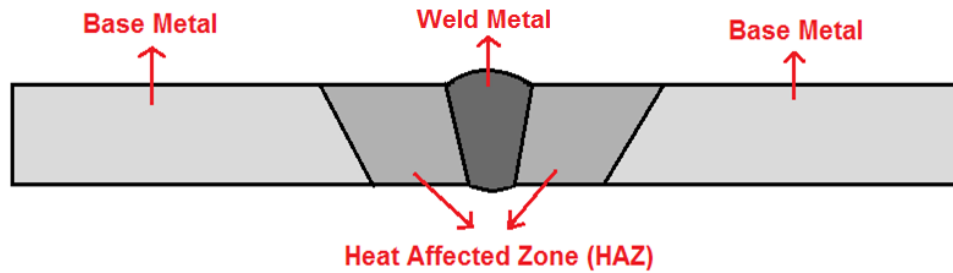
Basic Regions of a SMAW Weldment [10].
